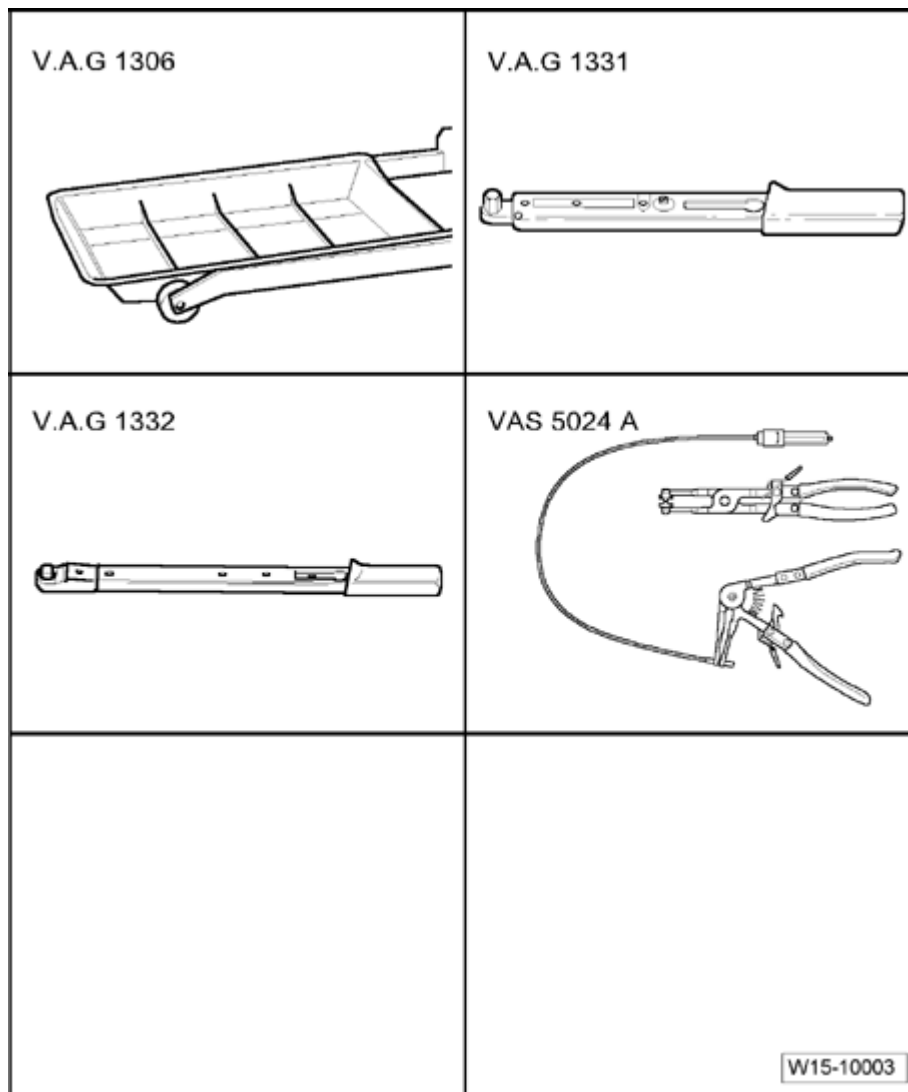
Identifying Special Tools - Cylinder Head, Removing And Installing
